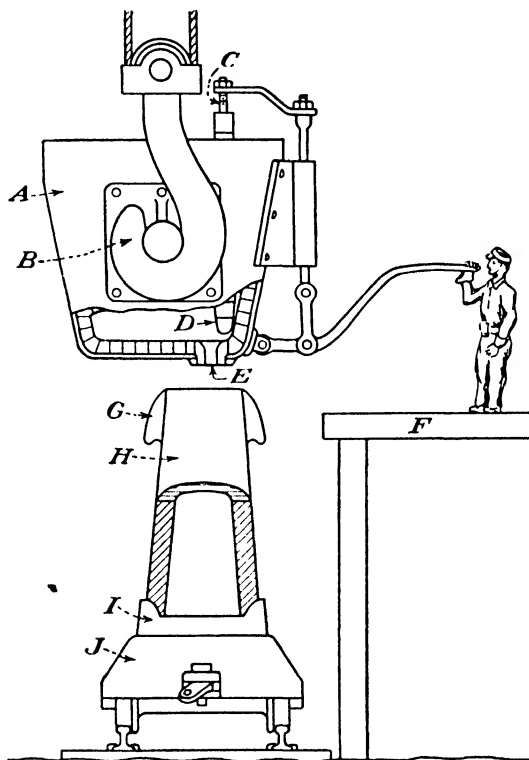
Pouring or teeming the ingot. (A) Ladle (steel shell lined with firebrick). (B) Crane hook. (C) Stopper rod. (D) Stopper head. (E) Nozzle. (F) Pouring platform. (G) Lug for removing mold from ingot. (H) Ingot mold (cast iron). (I) Stool. (J) Buggy.
